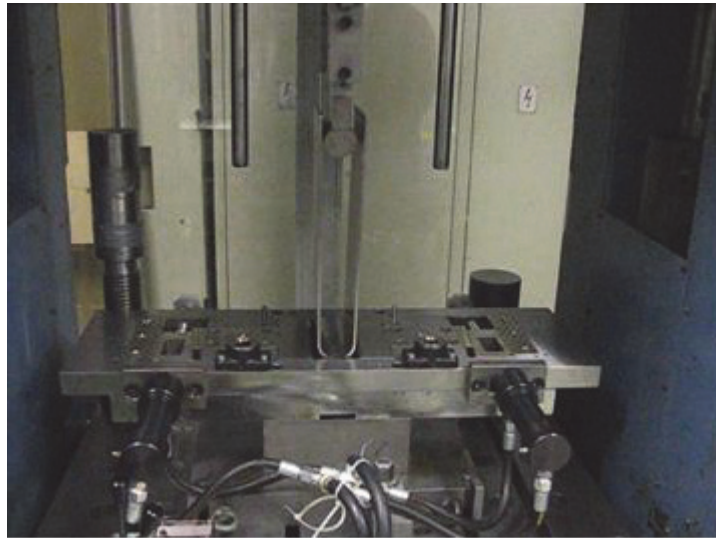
Fabrication step: 3x point bending of FMU Breeder Unit Cooling Plate (internal radius R25).
